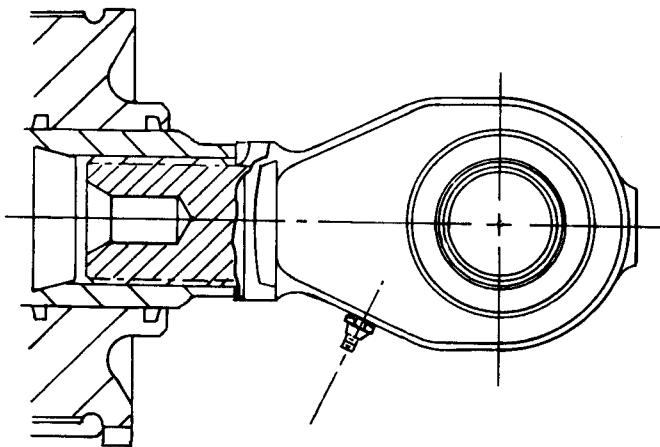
DC-10 SLAT ROD END INTERNAL ROD THREAD
